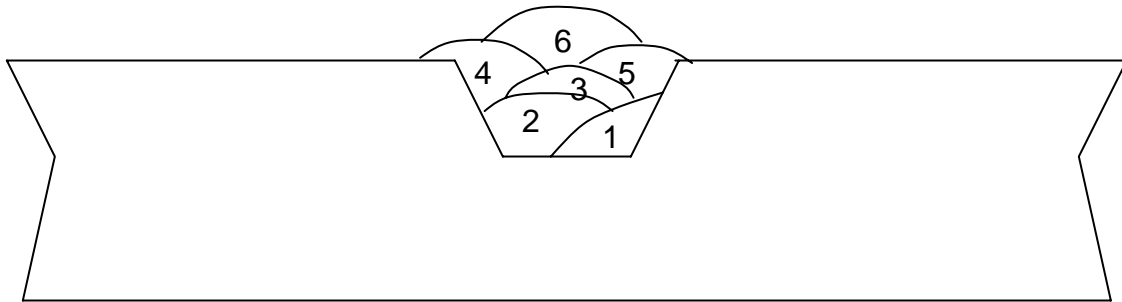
Illustrates six pass weld overlay in a machined flat bottom groove with beveled sides on the NAB block provided by NSW, Carderrock.
